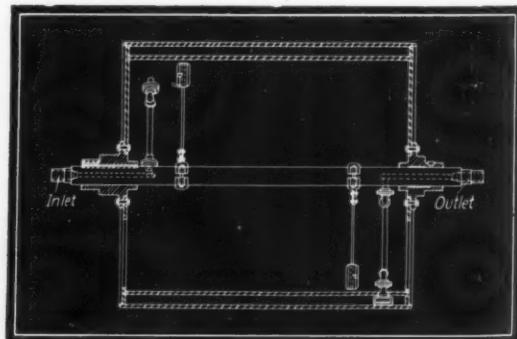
Inner shell of steam cylinder reduces heat loss, aids cooling on the stopping of machine
